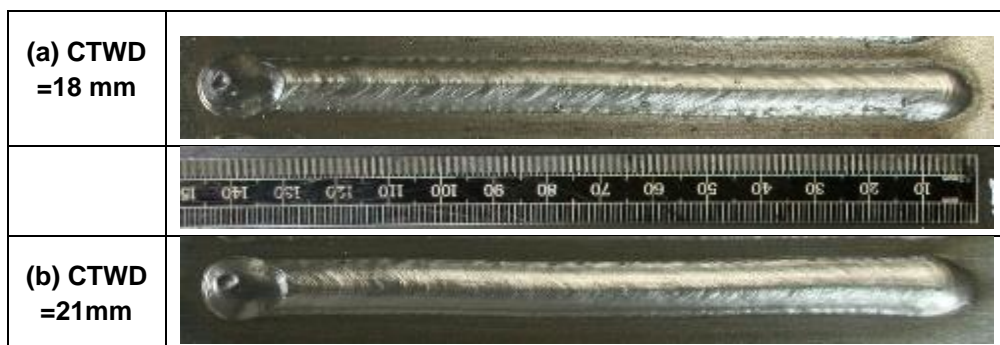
Morphology of weld bead surfaces produced using single-wire GMAW, with WFS= 6m/mins, TS = 7mm/s, and CTWD of (a) 18mm and (b) 21mm
